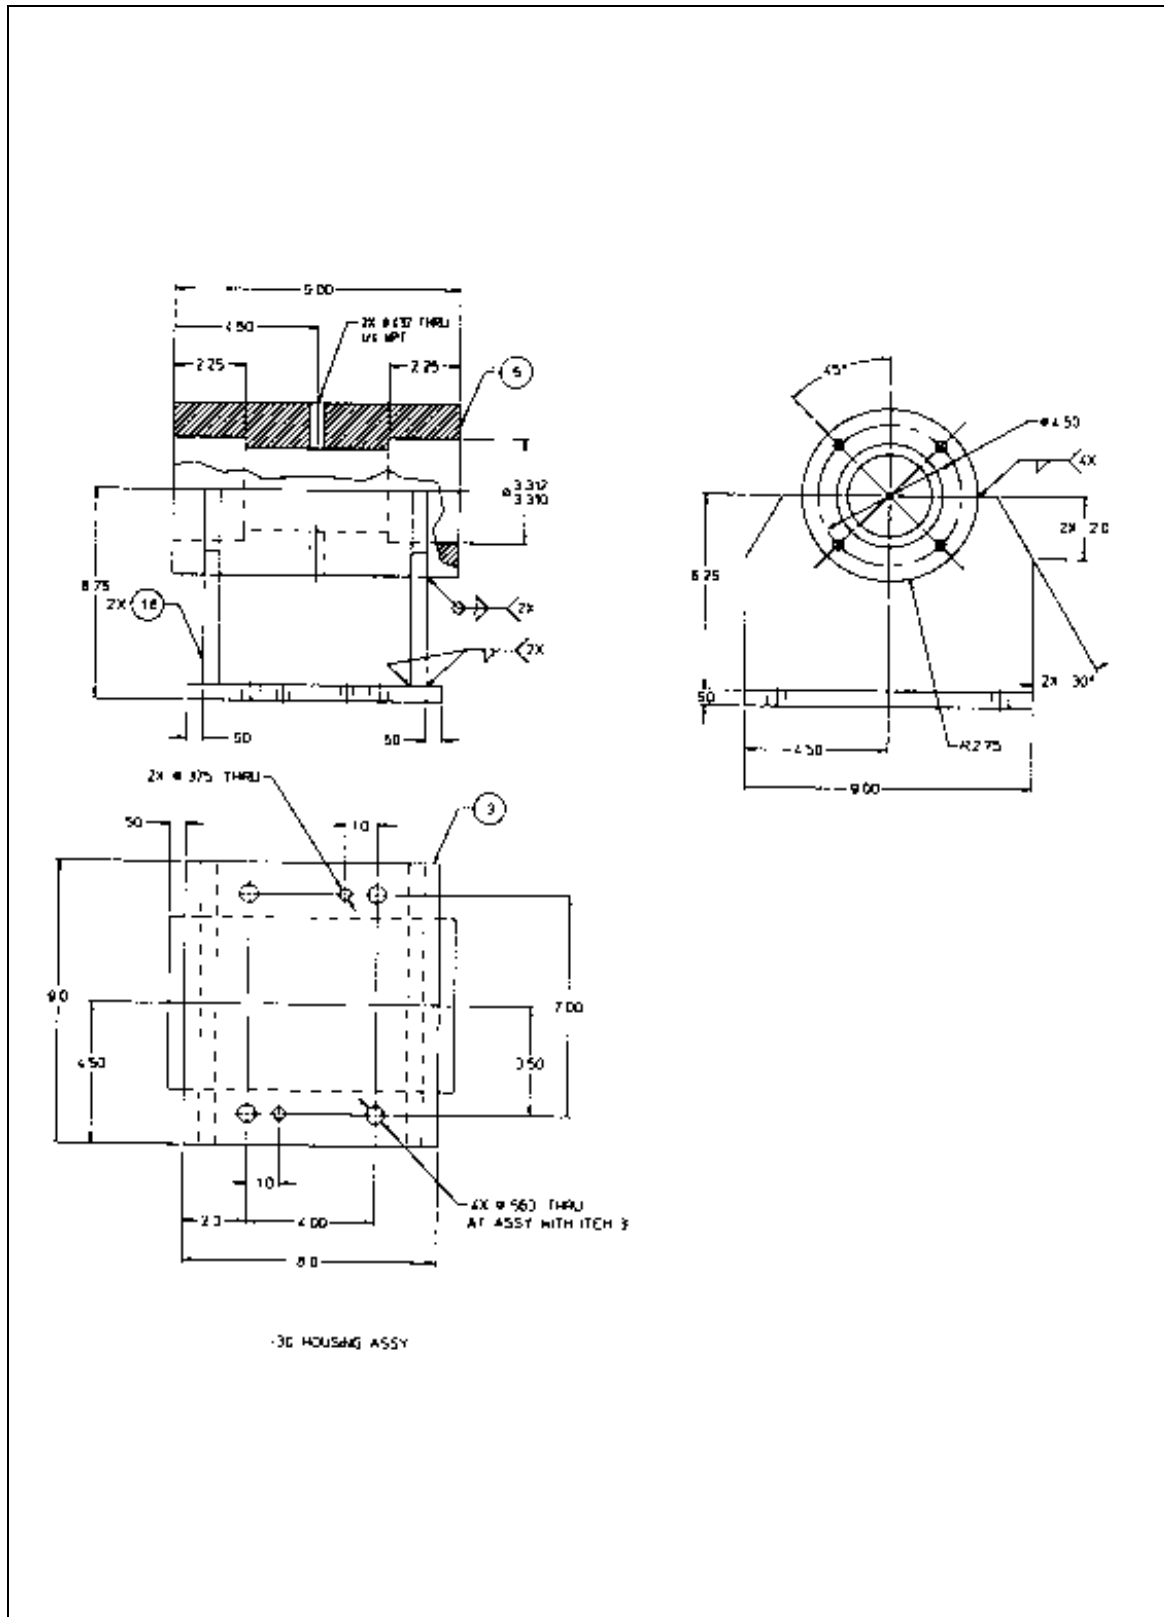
Reciprocating pump test device. (Sheet 2 of 3)
